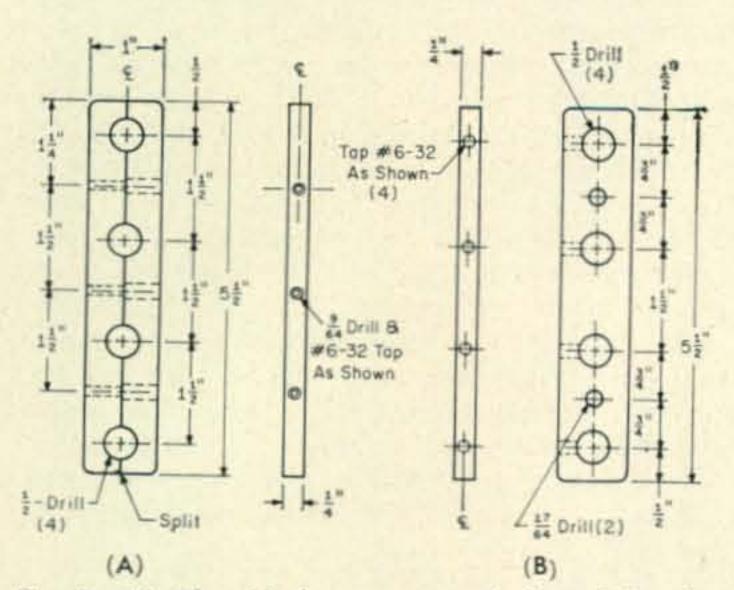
(A)—The side braces are made from ¼" polystyrene. The clamping screws should be 6-32 nylon, (B)—the two end pieces are made from ¼" aluminum (6061-T6)
